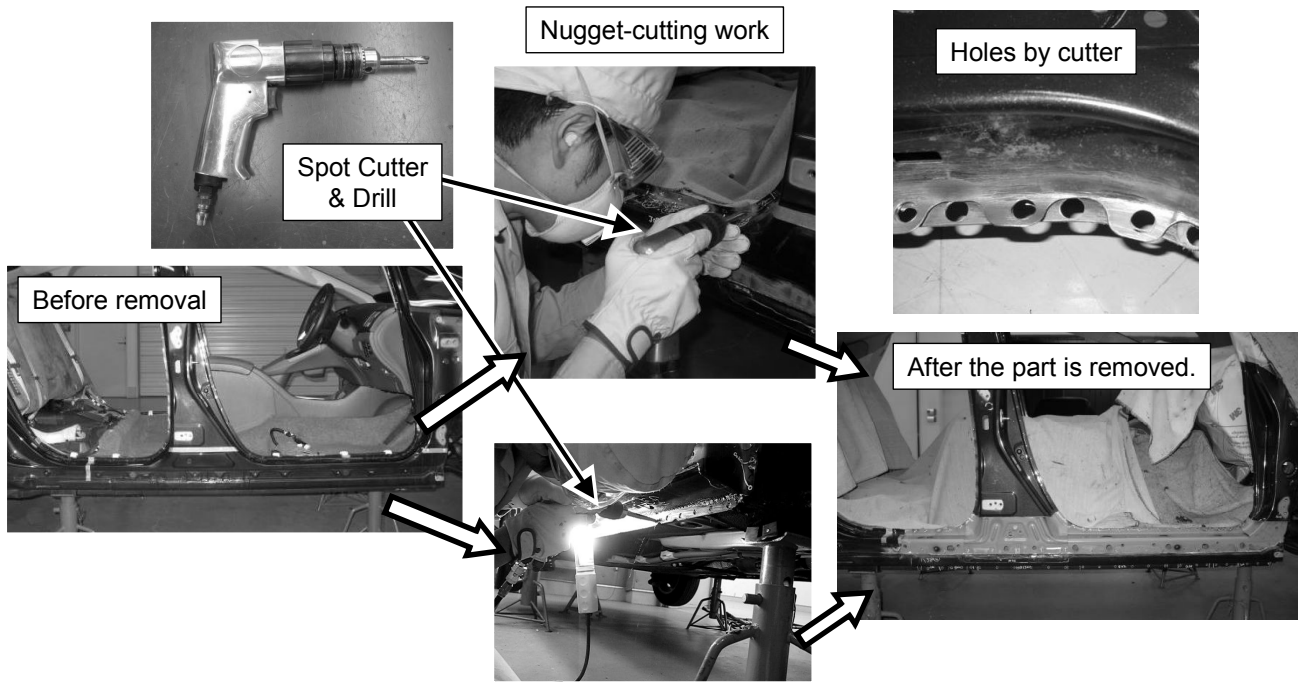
An Example of Procedure of Nugget-cutting Work Using a Spot Cutter to Remove Damaged Panels
